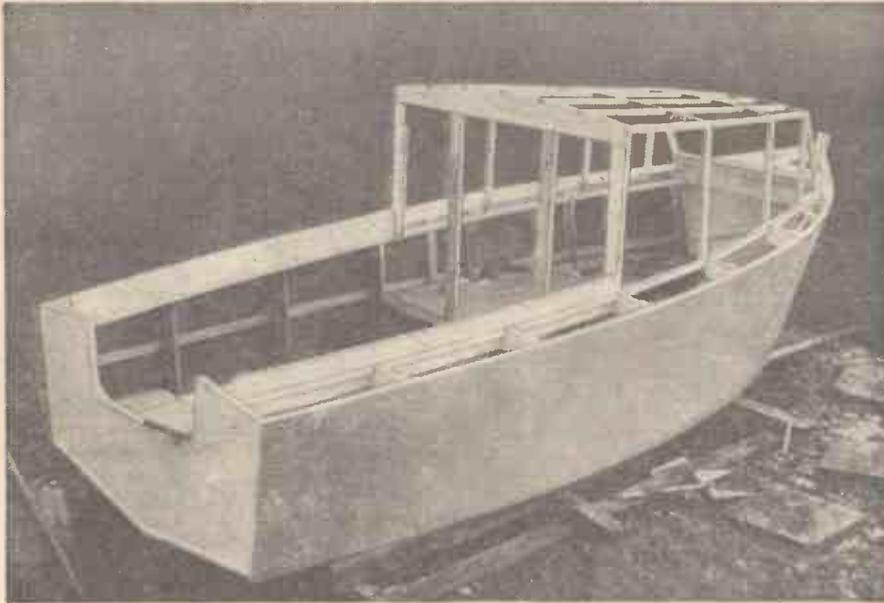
This stage shows the cabin framing and the cockpit coamings.
